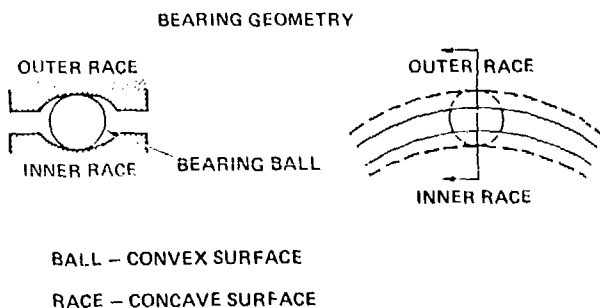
Bearing Geometry showing Convex (Ball) and Concave (Raceway) Surfaces
